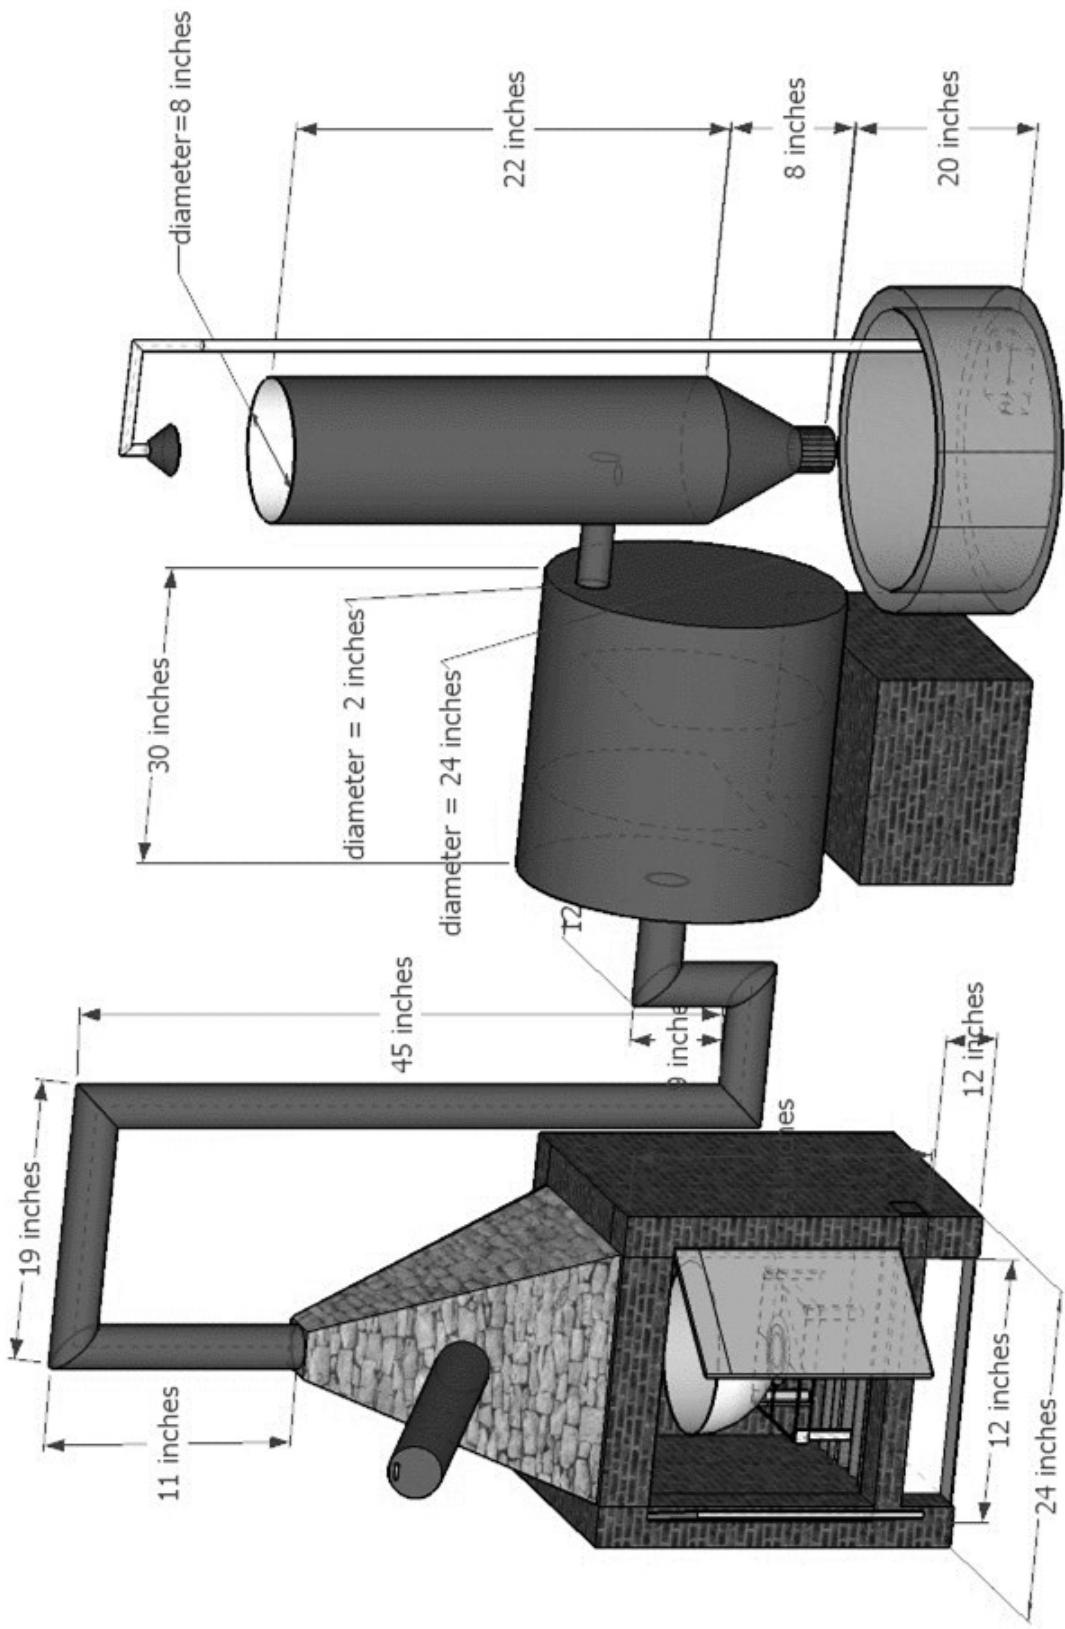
Liquid smoke flavoring preparation assembly (with dimensions)
